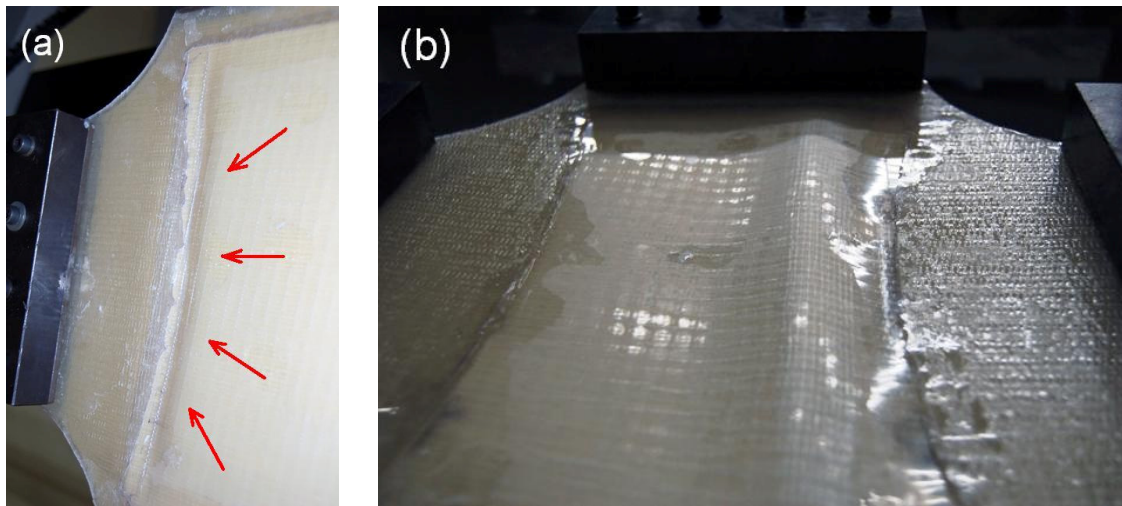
Wrinkling failure modes of [90/0] specimens: (a) wrinkling wave went inside foam; (b) wrinkling wave came out of foam.
